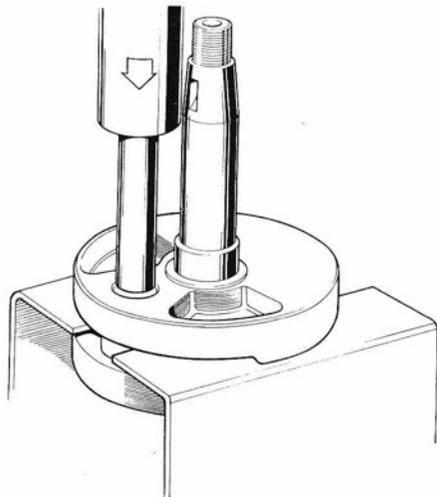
Supporting the crankshaft assembly whilst pressing out the crankpin.
